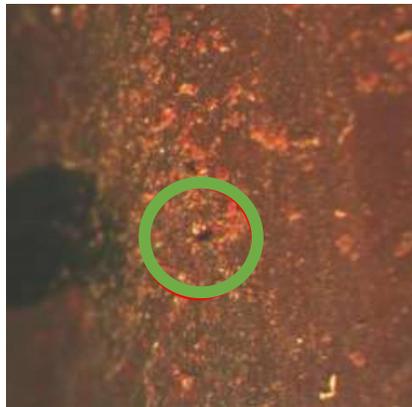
Localized corrosion/pitting on outside diameter of copper tube (magnified image)
